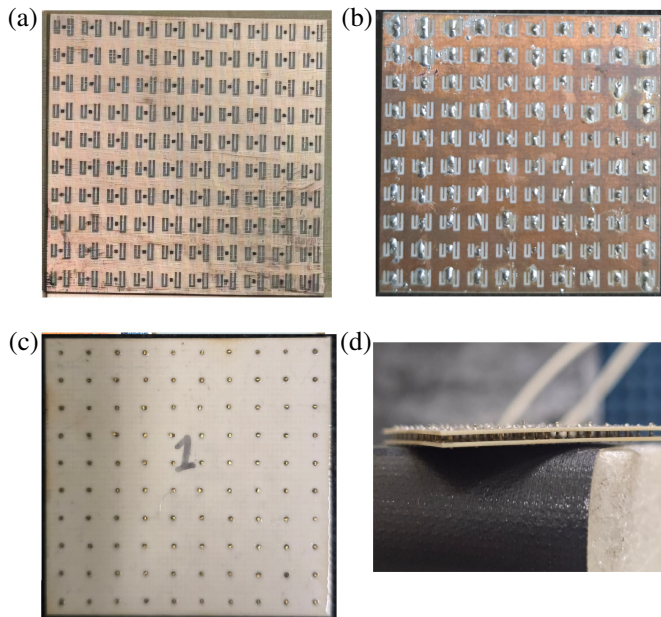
Fabricated transmissive-reflective polarization converter: (a) structure before soldering the metallic posts, (b) structure after soldering the metallic posts, (c) bottom view of the lower metallic layer, and (d) side view showing the metallic posts connecting the two layers.
